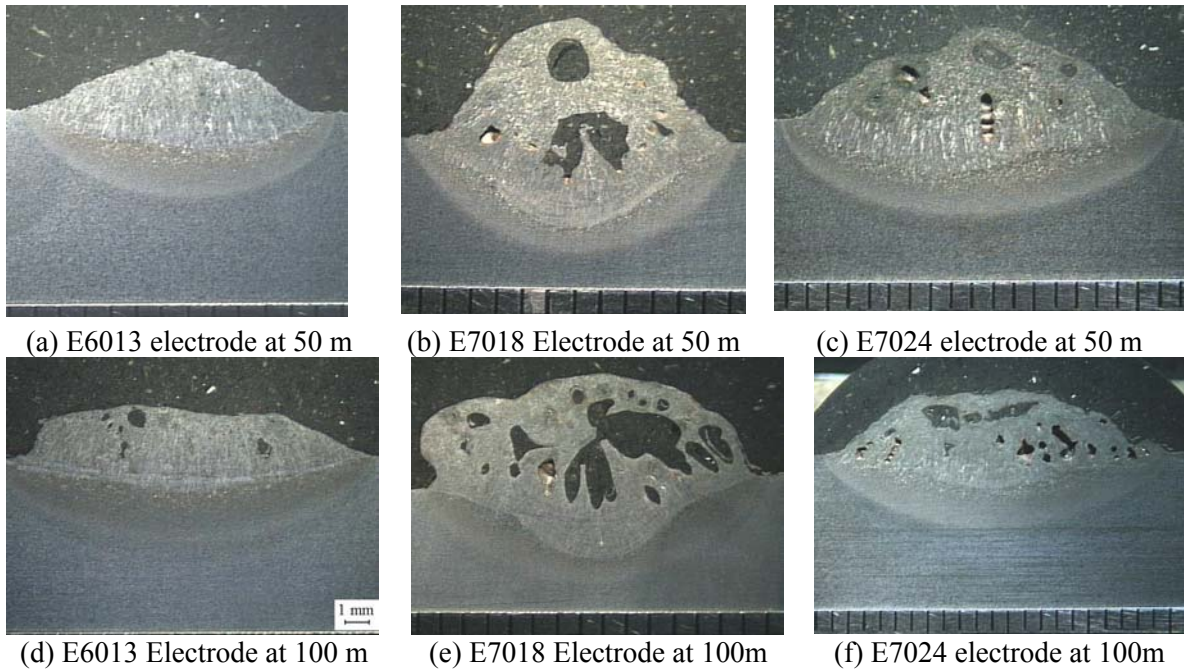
Cross-section macrographs from the center of the BOP wet welds deposited with the E6013, E7018 and E7024 electrodes using electrode positive at 50 and 100m.
